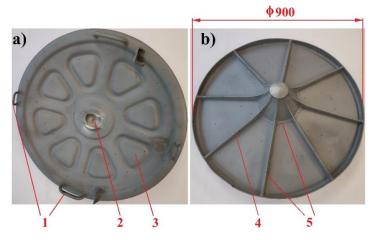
Mortar base plate: a) – view from above, b) – view from below, consisting of: 1 - transport handles, 2 - ball socket, 3 - stiffening embossments, 4 - strengthening ribs, 5 - welded joints.
